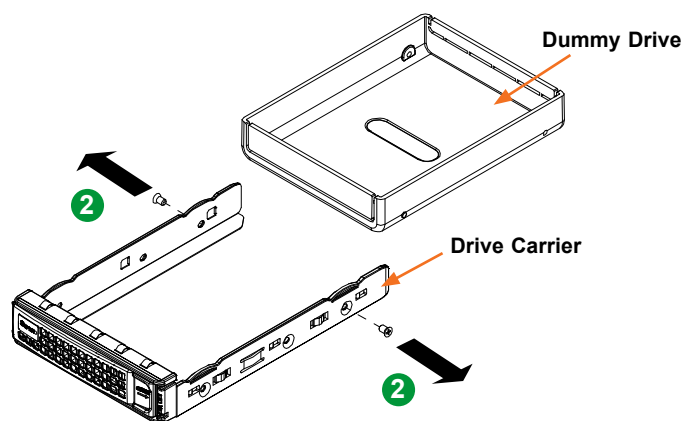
Removing a Dummy Drive from the Drive Carrier
